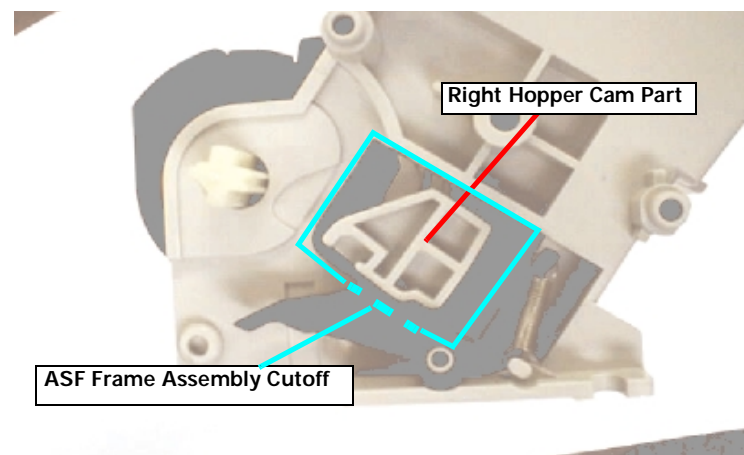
ASF Hopper Assembly Cam Part Aligning Point
